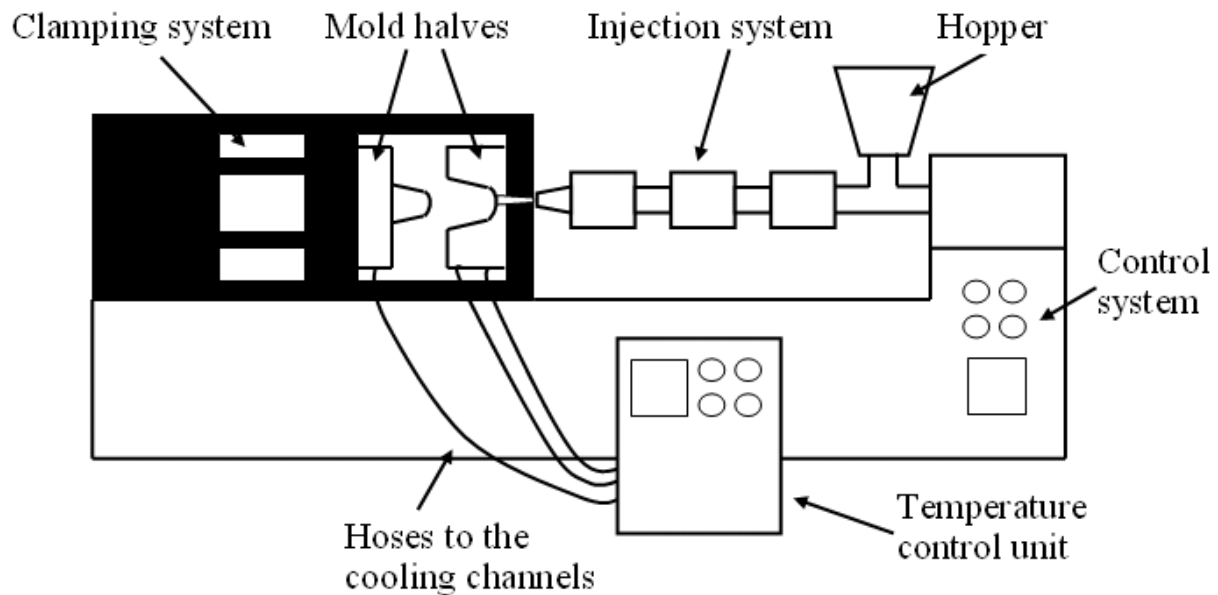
Schematic figure of the injection molding machine, the heat exchange system and the mold.
